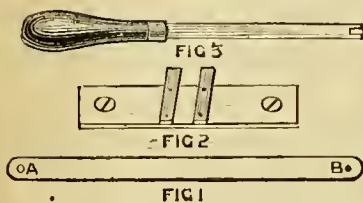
DIVIDERS.—A, Hole for Pin; B, Stud Pin. FIG. 2.—SOCKET FOR FIXING TO LATHE AND SLOT FOR DIVIDER. FIG. 3.—GUIDE TOOL FOR CUTTING NUTS.
